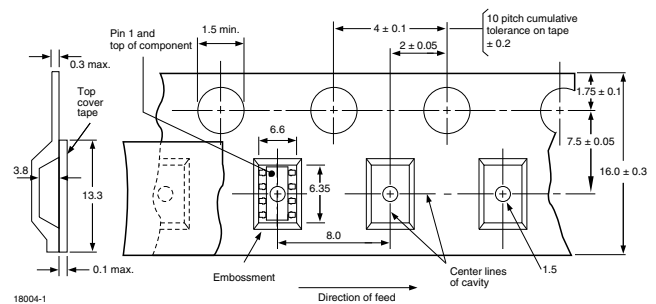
Tape Dimensions, 2000 Parts per Reel
